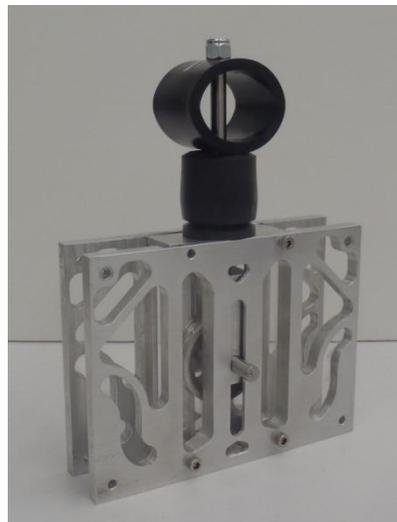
Final Spring Assembly. Note that spring spacers are not depicted in this picture but are installed in the final assembly.
